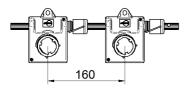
Axial dimension with JA drive motor on one side and centrally positioned
